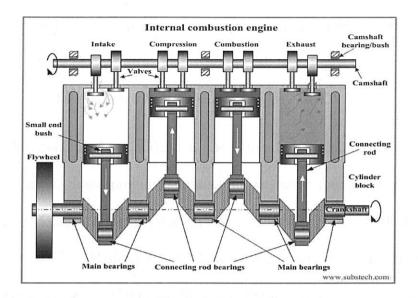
Location of an engine bearing in a four cylinder combustion engine.
